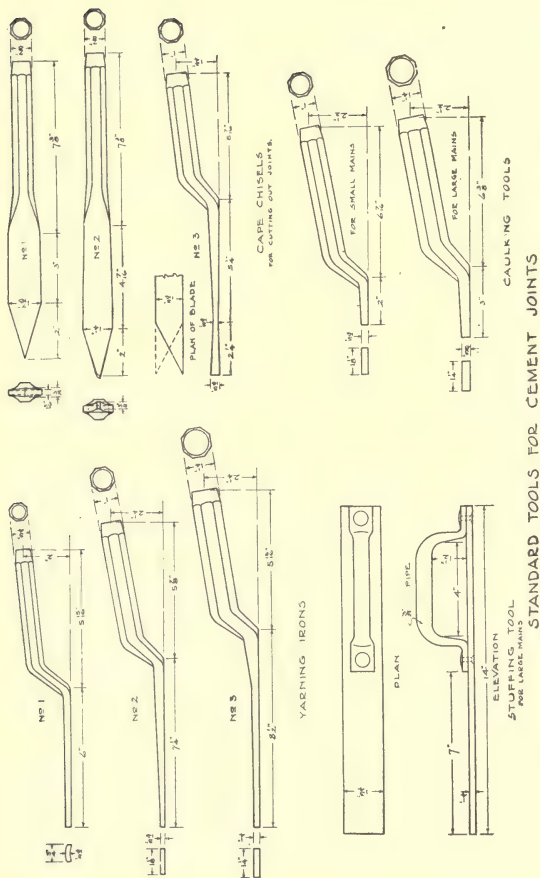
gives details of a set of yarning irons and caulking tools for caulking or driving large cement joints. A caulking tool, slightly curved to approximately conform to the curvature of the pipe, and about $1\frac{1}{4}$ inches wide and $\frac{3}{8}$ -inch thick, is very satisfactory for general cement joint work. For large joint work, it is advisable to have all caulking tools quite heavy, and for the heaviest work, $1\frac{1}{4}$ -inch octagonal tool steel should be used. The heads are dressed carefully, and the points are tempered medium hard.
